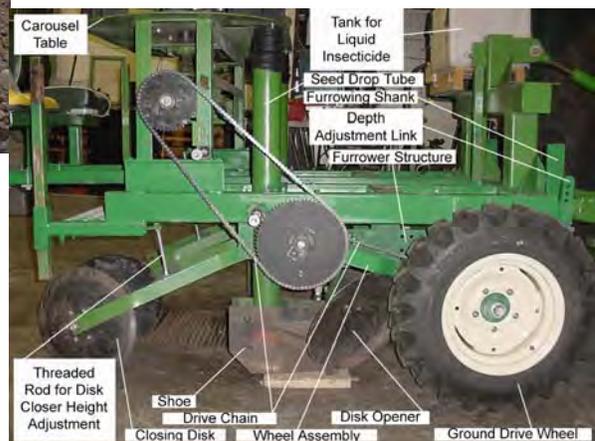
Potato planter after redesign in 2002 (gear and chain shield removed to show details).
